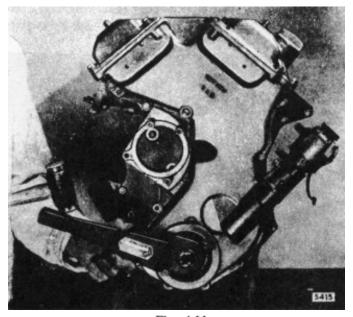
Removal of the starting dog nut, using service tool 18G98
